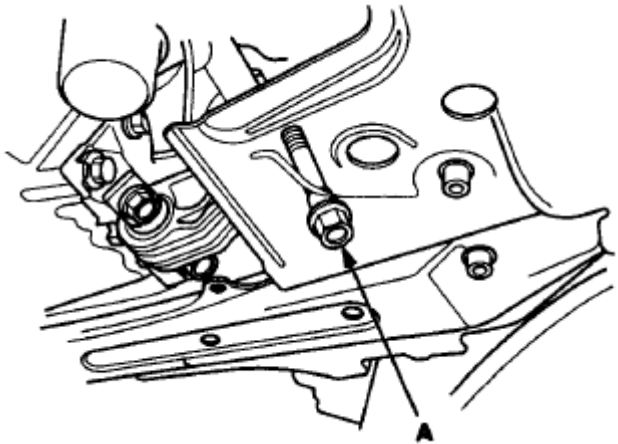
Identifying Lower Torque Rod Mounting Bolt
